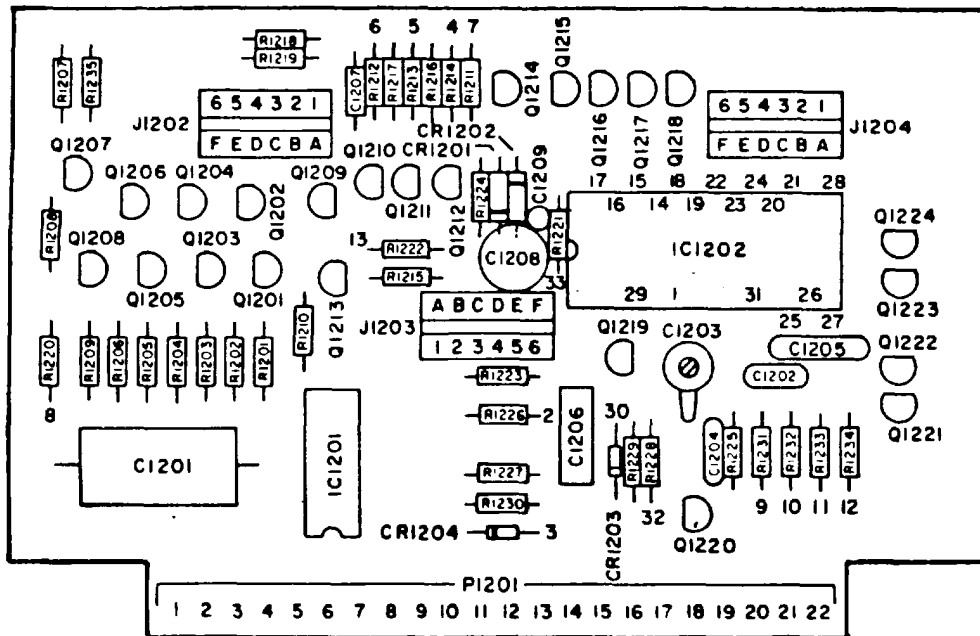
RF MILLIVOLTMETER, TOP COVER REMOVED, (SHEET 4 OF 7).
